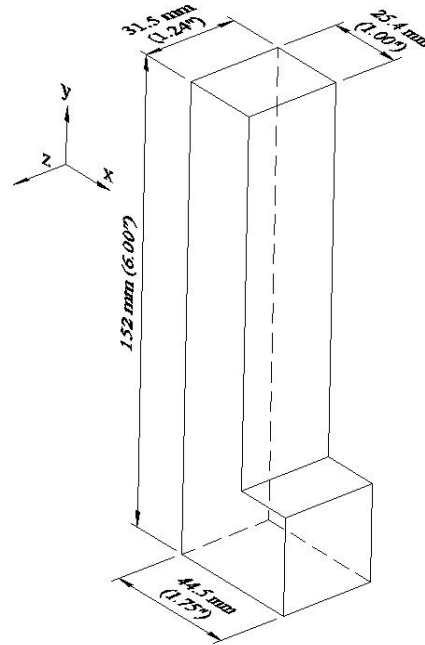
SIMULATED TEST FIXTURE DIMENSIONS
